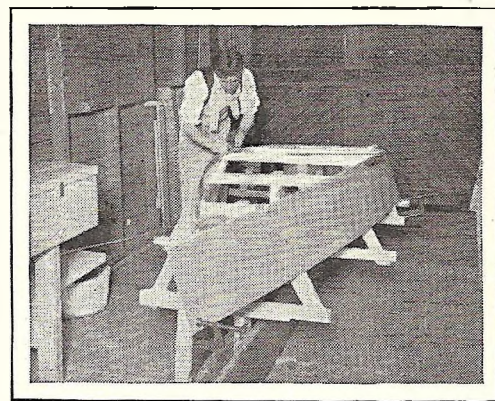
The strongback is lowered to the floor. Chine pieces put around the molds and fastened to the transom. Then the bottom strake of planking is bent around and cut to shape, later being fastened.
